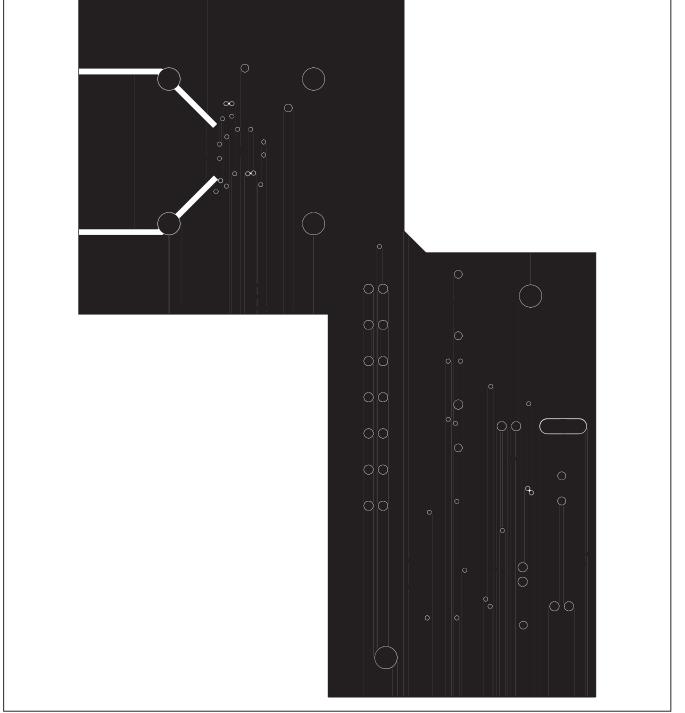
MAX3799 EV Kit PCB Layout—Ground Plane
